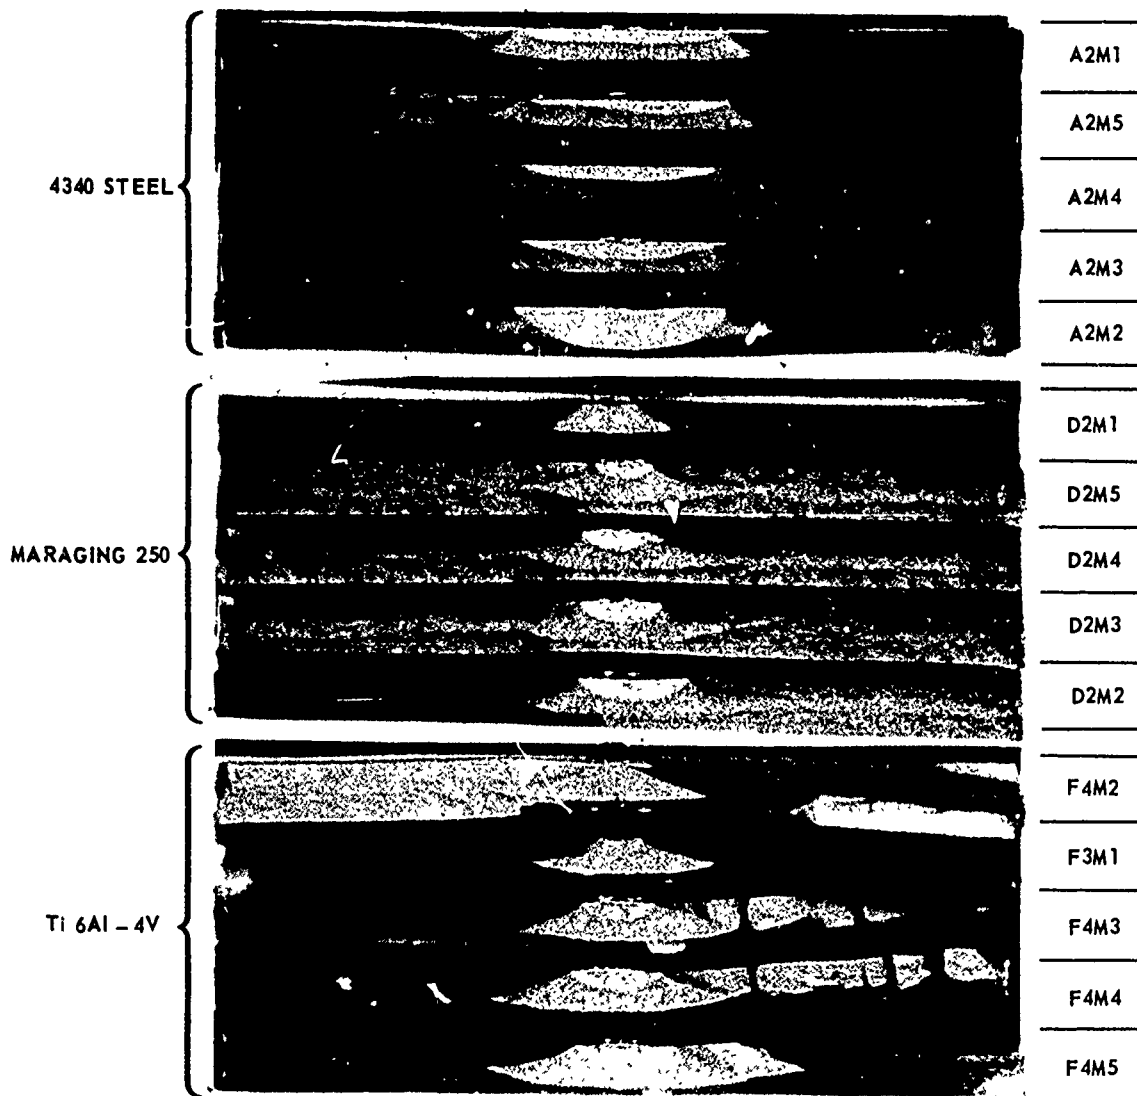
FRACTURE FACES OF SURFACE CRACK SPECIMENS
